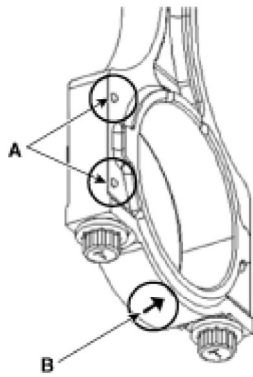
Identifying Connecting Rod Projections & Front Mark
